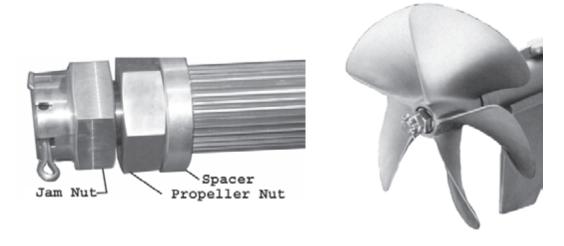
Propeller Retaining Parts (left), and Propeller Installed (right)
